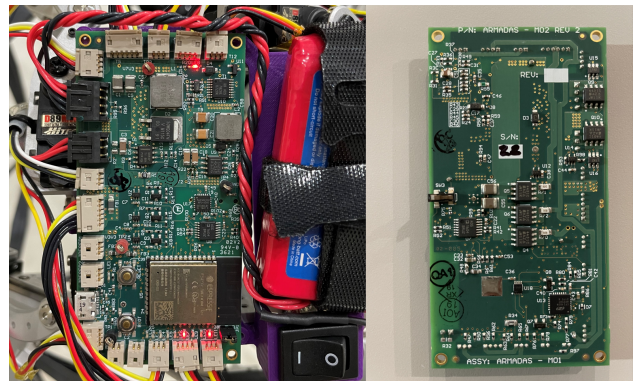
MMIC-I’s custom made controller board - top view mounted on the robot (left), bottom view (right).
